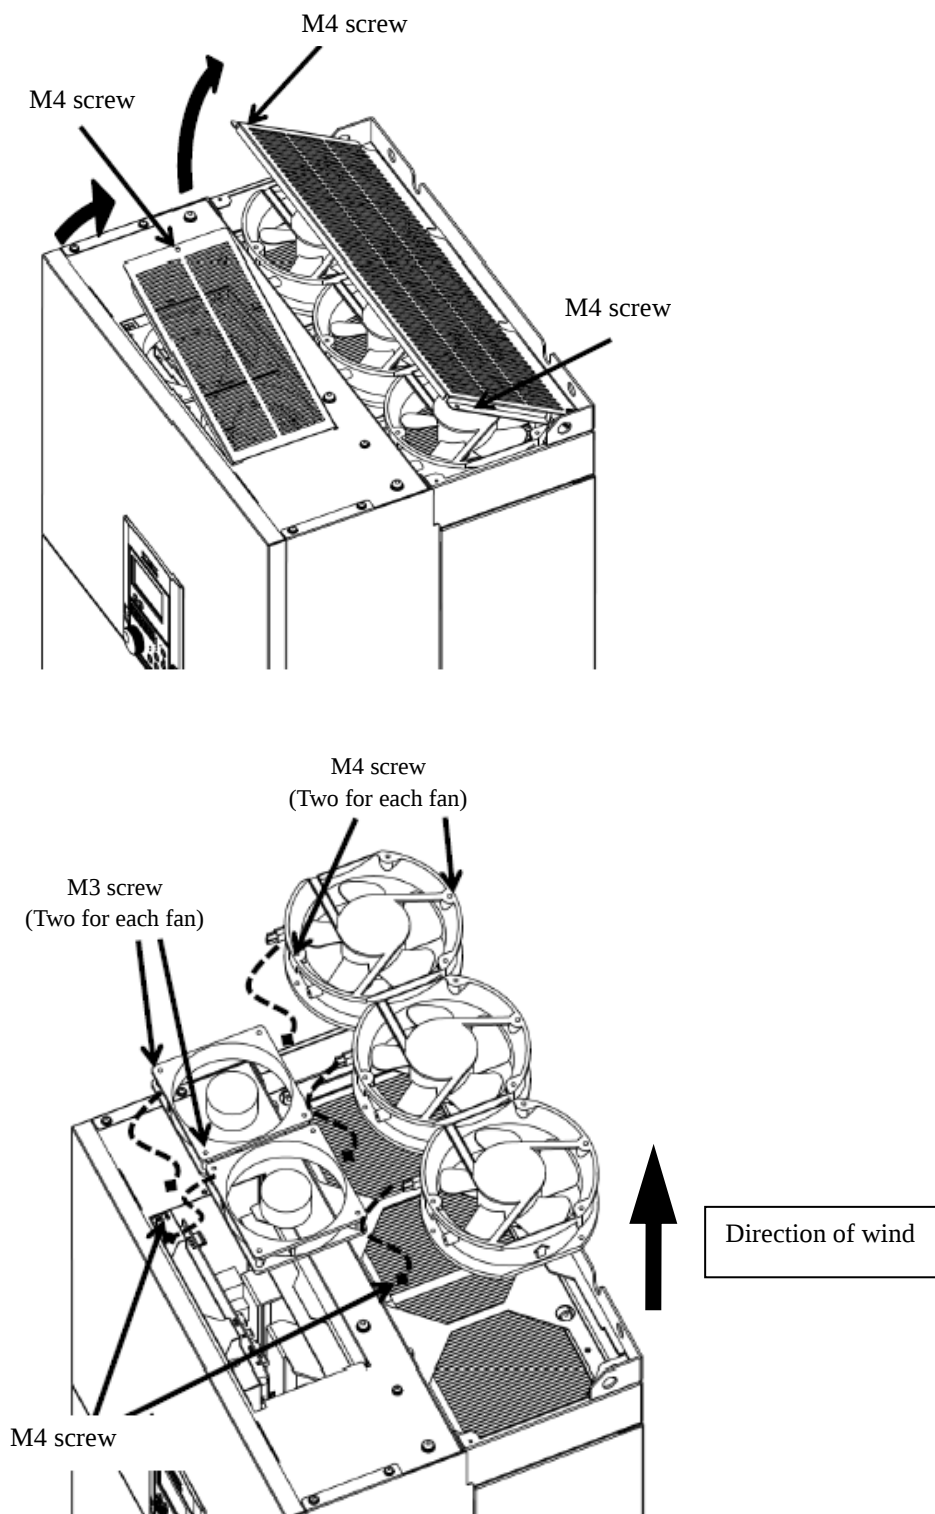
Replacement steps of fan (SVC06-0900 - 2500)
